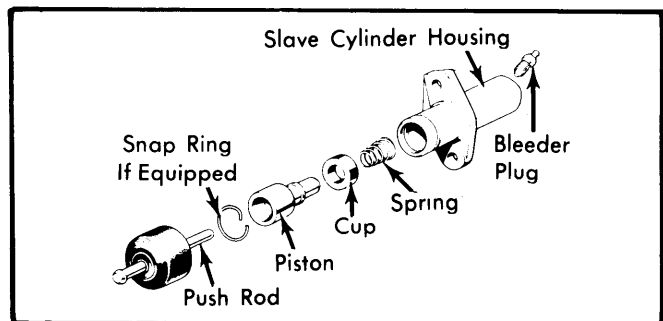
Exploded View of Clutch Slave Cylinder (TR7 Shown, Spitfire Similar)
